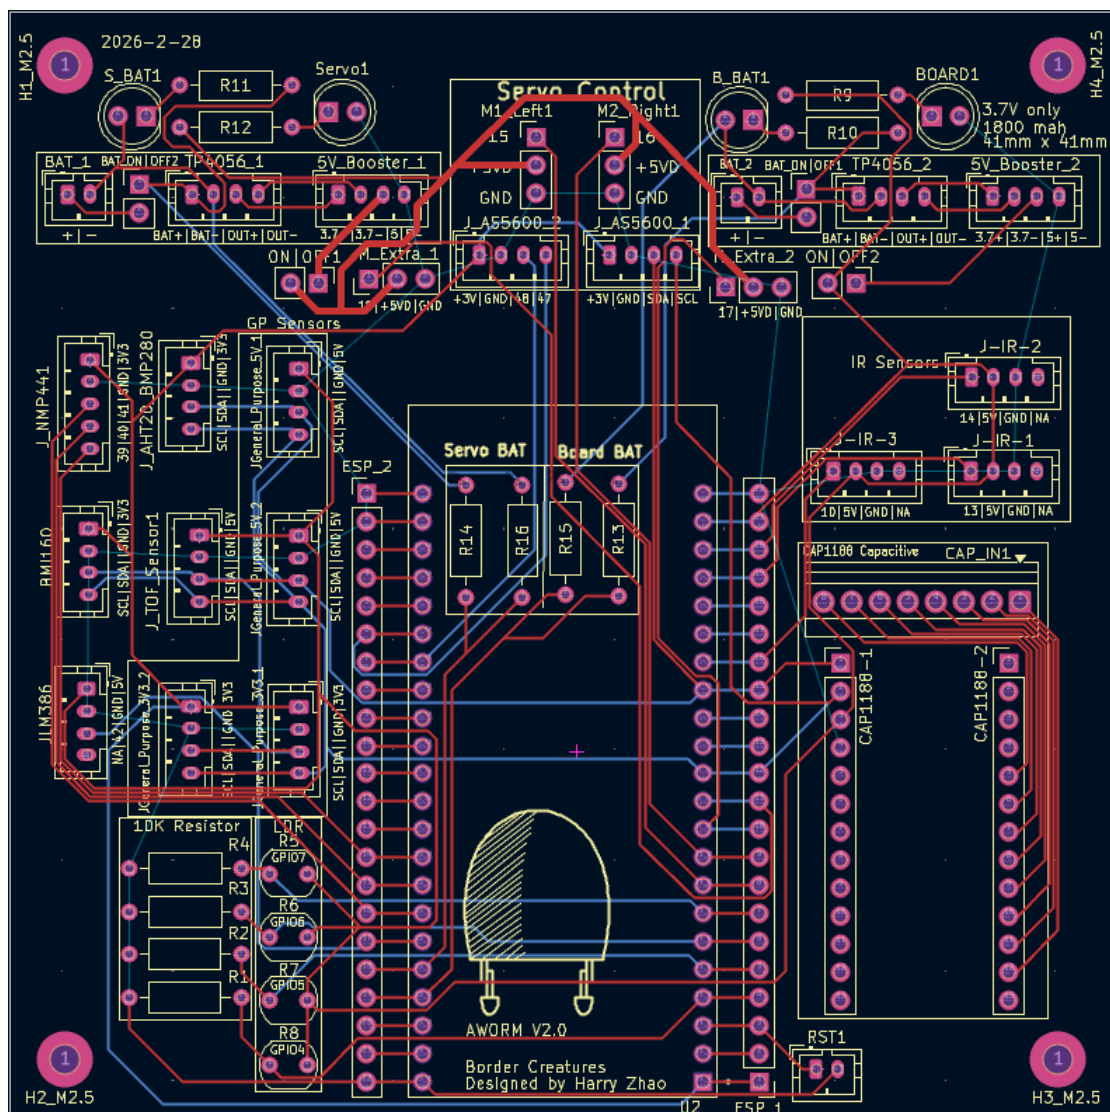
AWORM PCB v2.1 in KiCad 9.0
